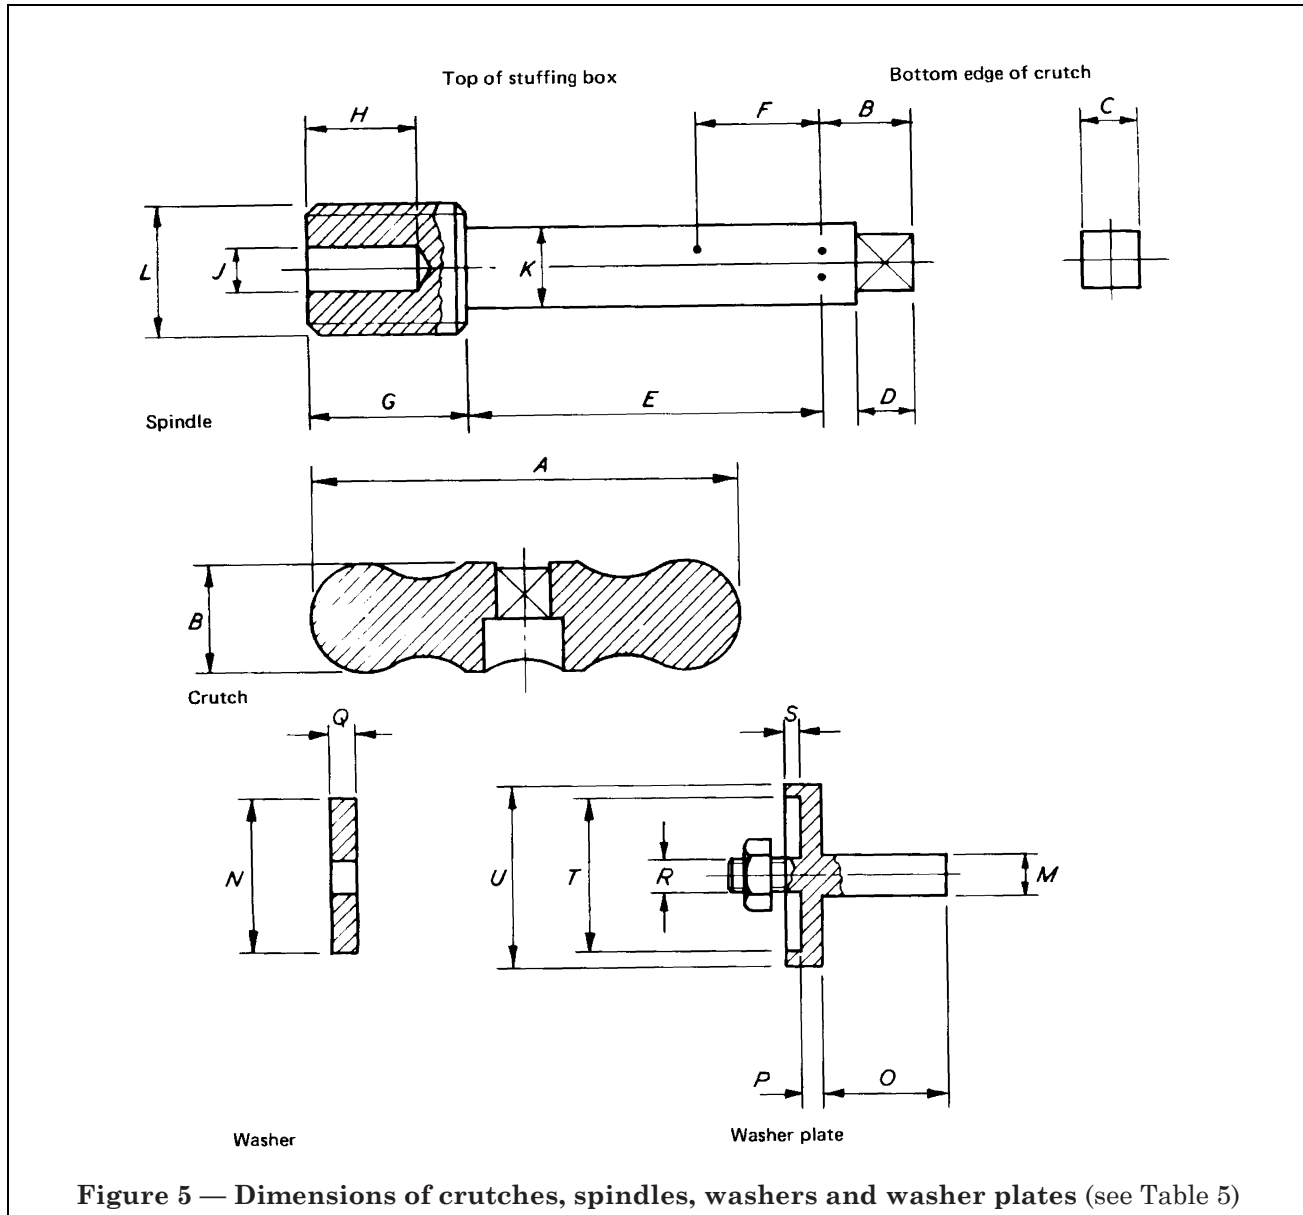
Dimensions of crutches, spindles, washers and washer plates (see Table 5)
